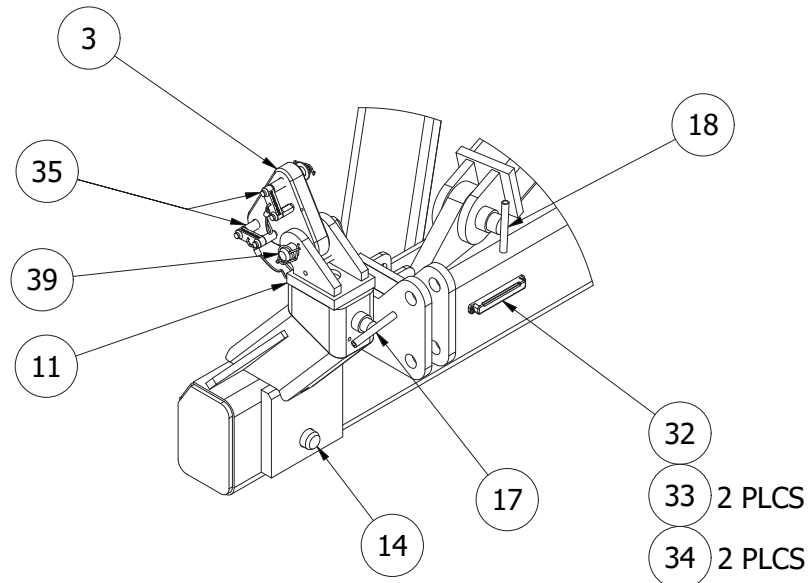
AGSE-E24002-S01 Caster Assembly
